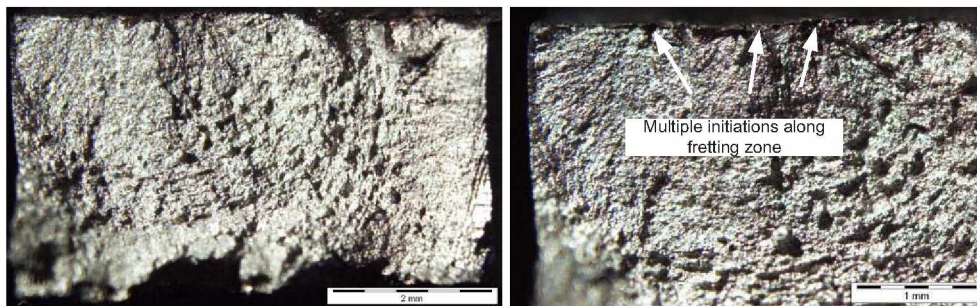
Fracture surface of a V-shape mill-annealed specimen at 350 MPa, overview (l) and detail (r)
